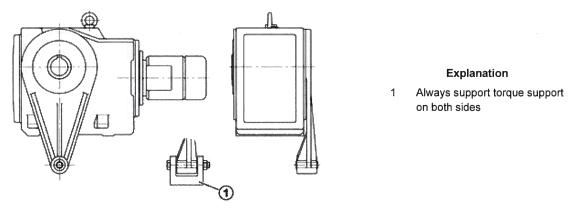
Attaching the torque support on bevel gear and worm gear units
